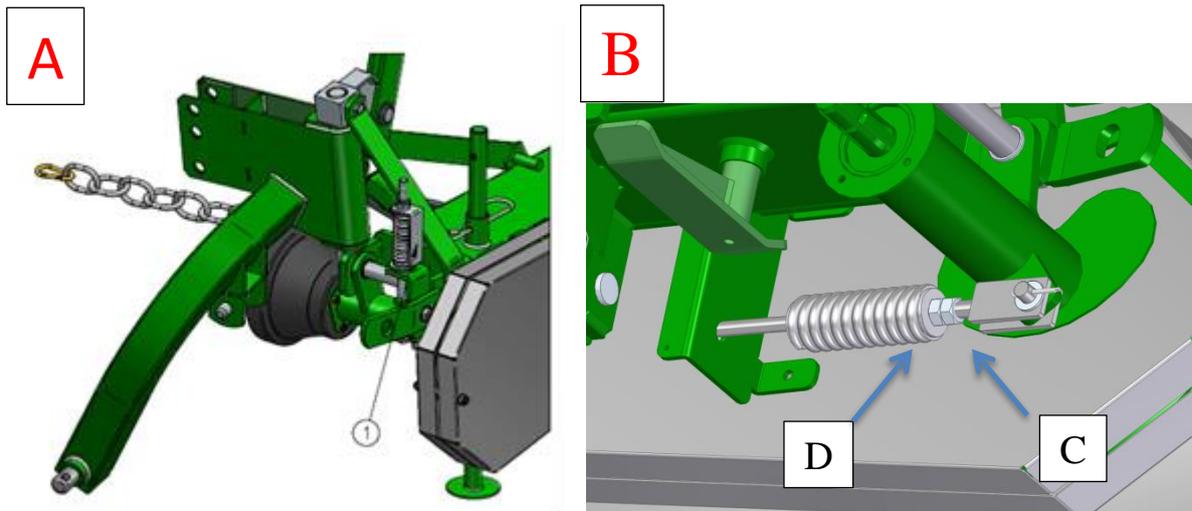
Adjustment of the V-belts tension: A) Belt tensioner B) for Eco CUT 210 version
